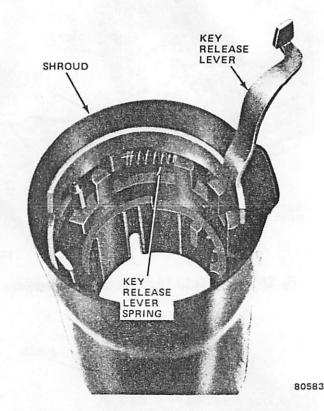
J-62 Key-Release Lever and Spring Removal/Installation
